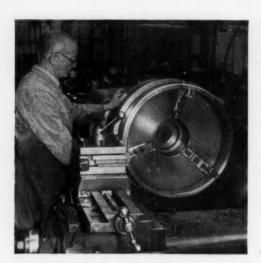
Machining a Large Race, of 27-1 in. External Diameter, on a Swift Type 16 SV 5 Lathe. These Machines are Employed for Races up to 50 in. Diameter
